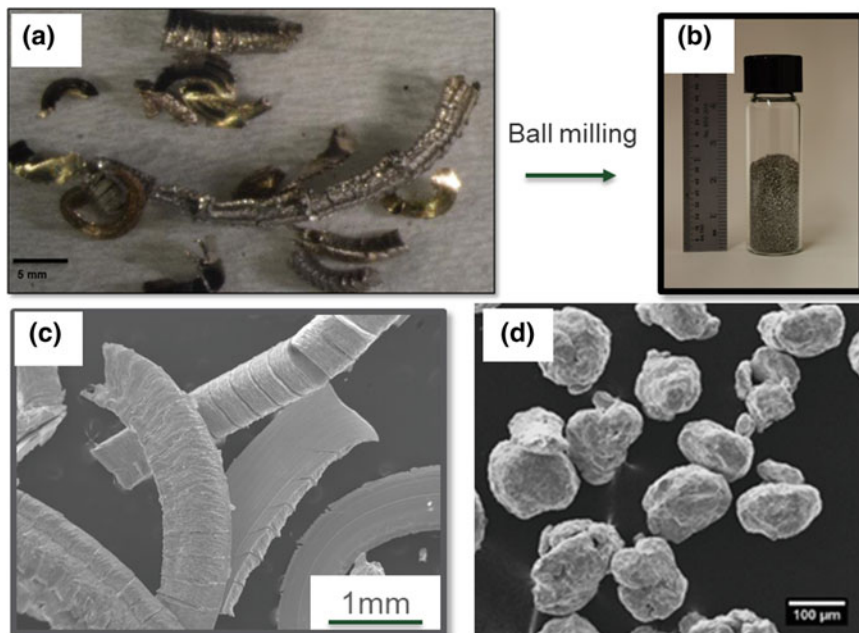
a Optical image of the machining chips; b picture of the powders created by ball milling of machining chips; c SEM image of the machining chips; d SEM image of the powders created by ball milling of the machining chips
